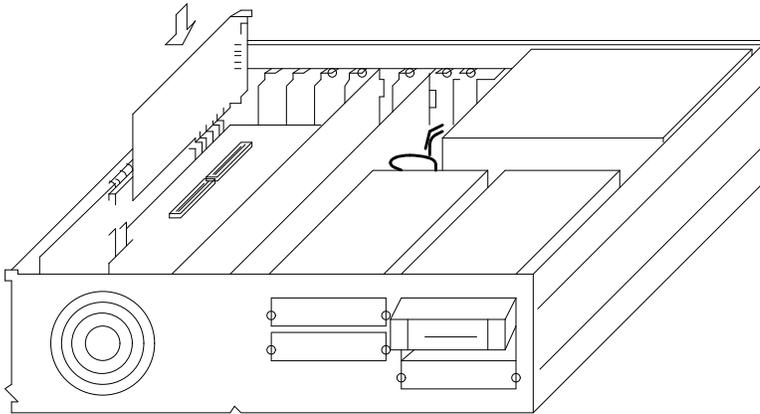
Inserting the DCP Board into a 6386/25 Expansion Slot
